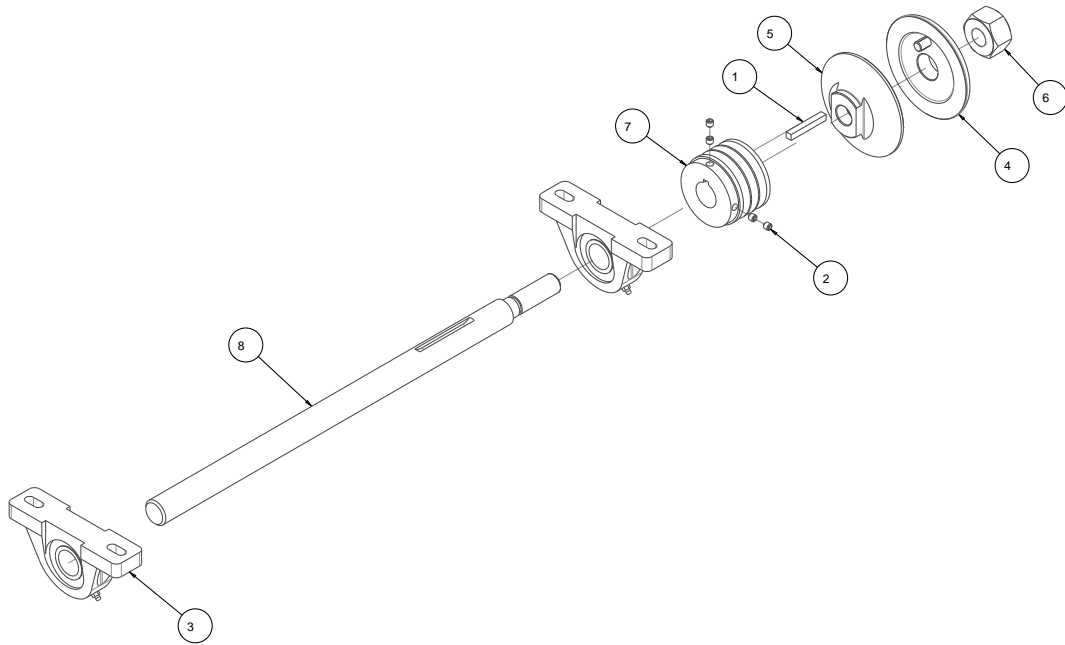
MK-1610 PREMIUM LESS MTR, 18" BG-SS P/N 172432
